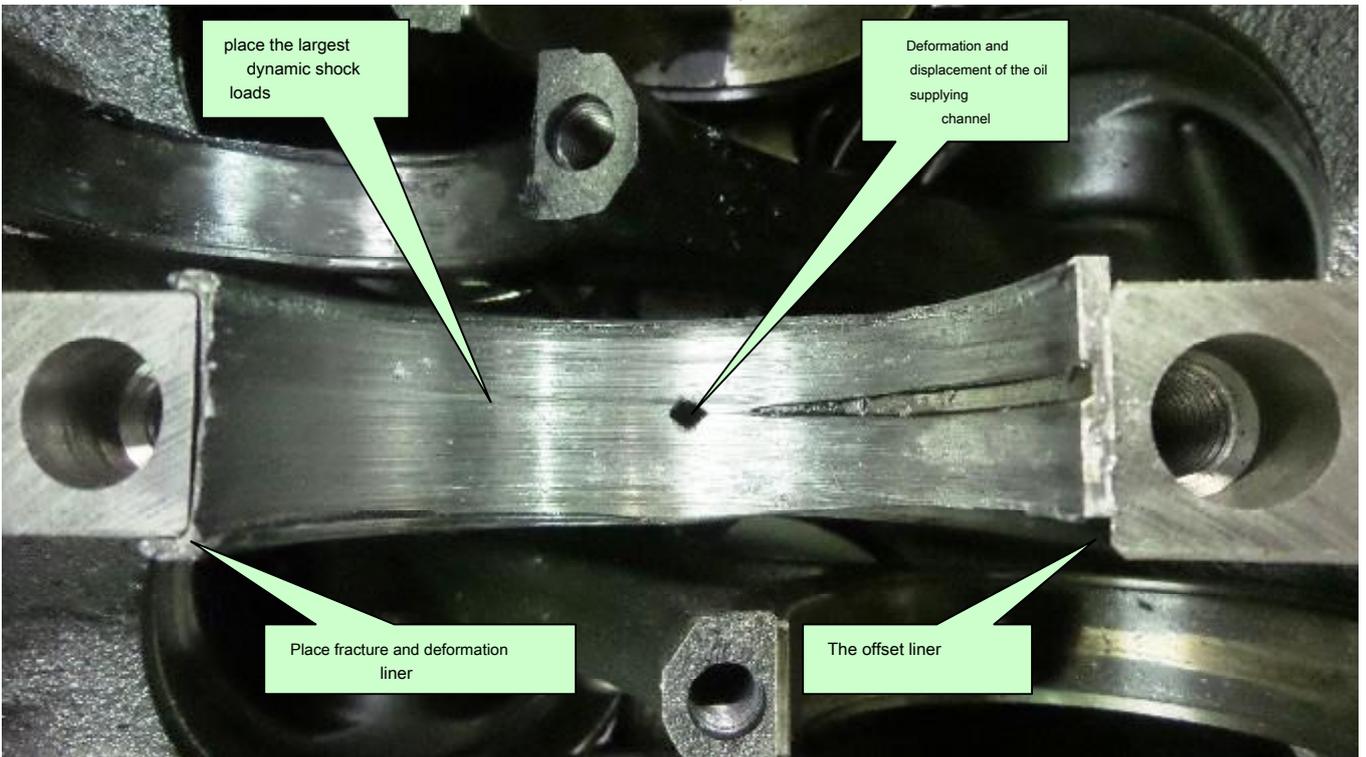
Root insert after removal of the test vehicle the crankshaft of the engine LAND ROVER
